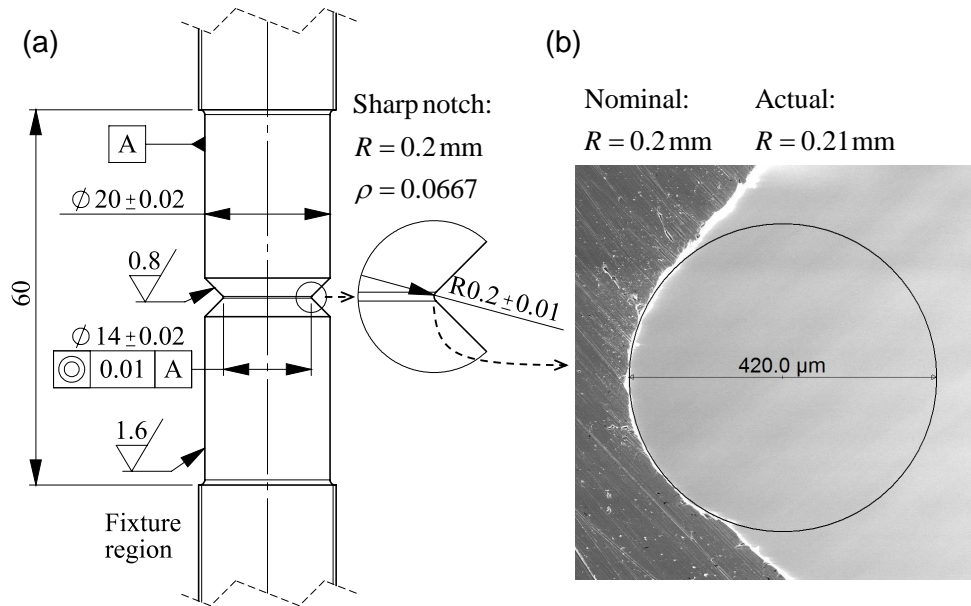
(a) Drawing of the sharp V-notched specimen, dimensions and recommended manufacturing tolerances. (b) Evidence of the actual notch radius after a cross section.
